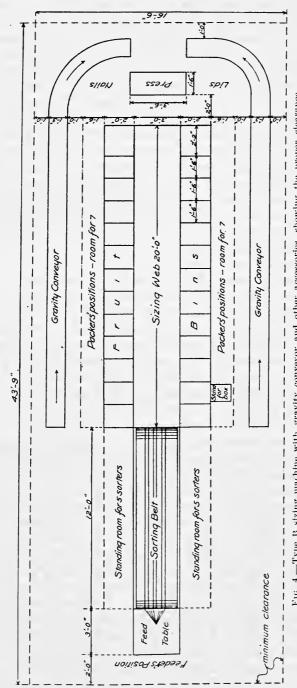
Type B sizing machine with gravity conveyor and other accessories, showing the proper clearance.
